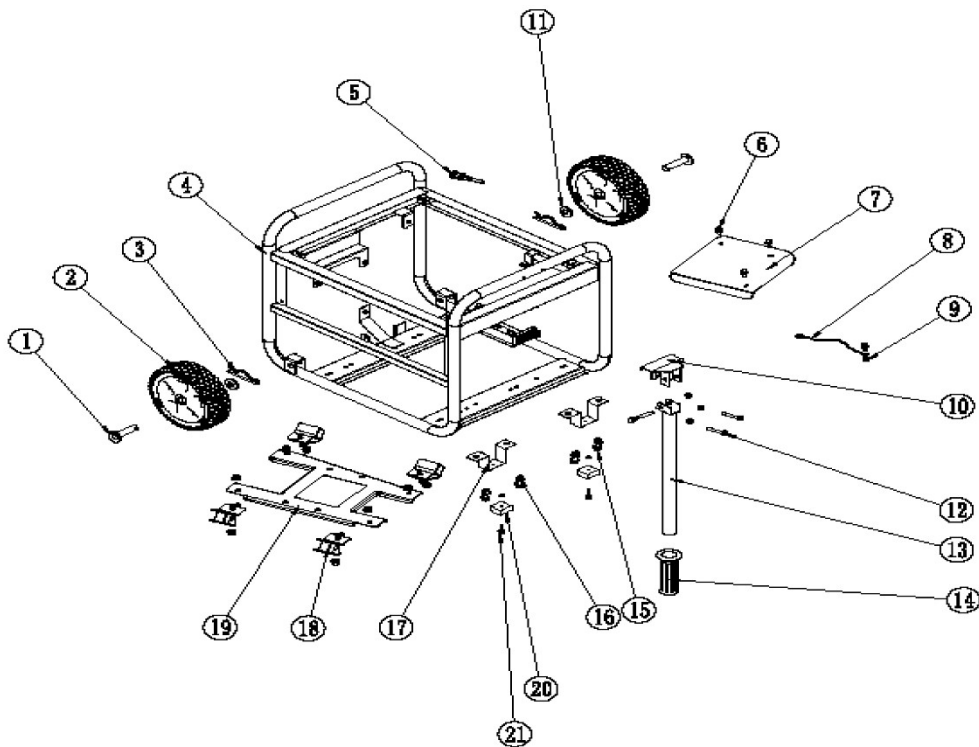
Spare parts drawing 7 PG-I 42 SE
